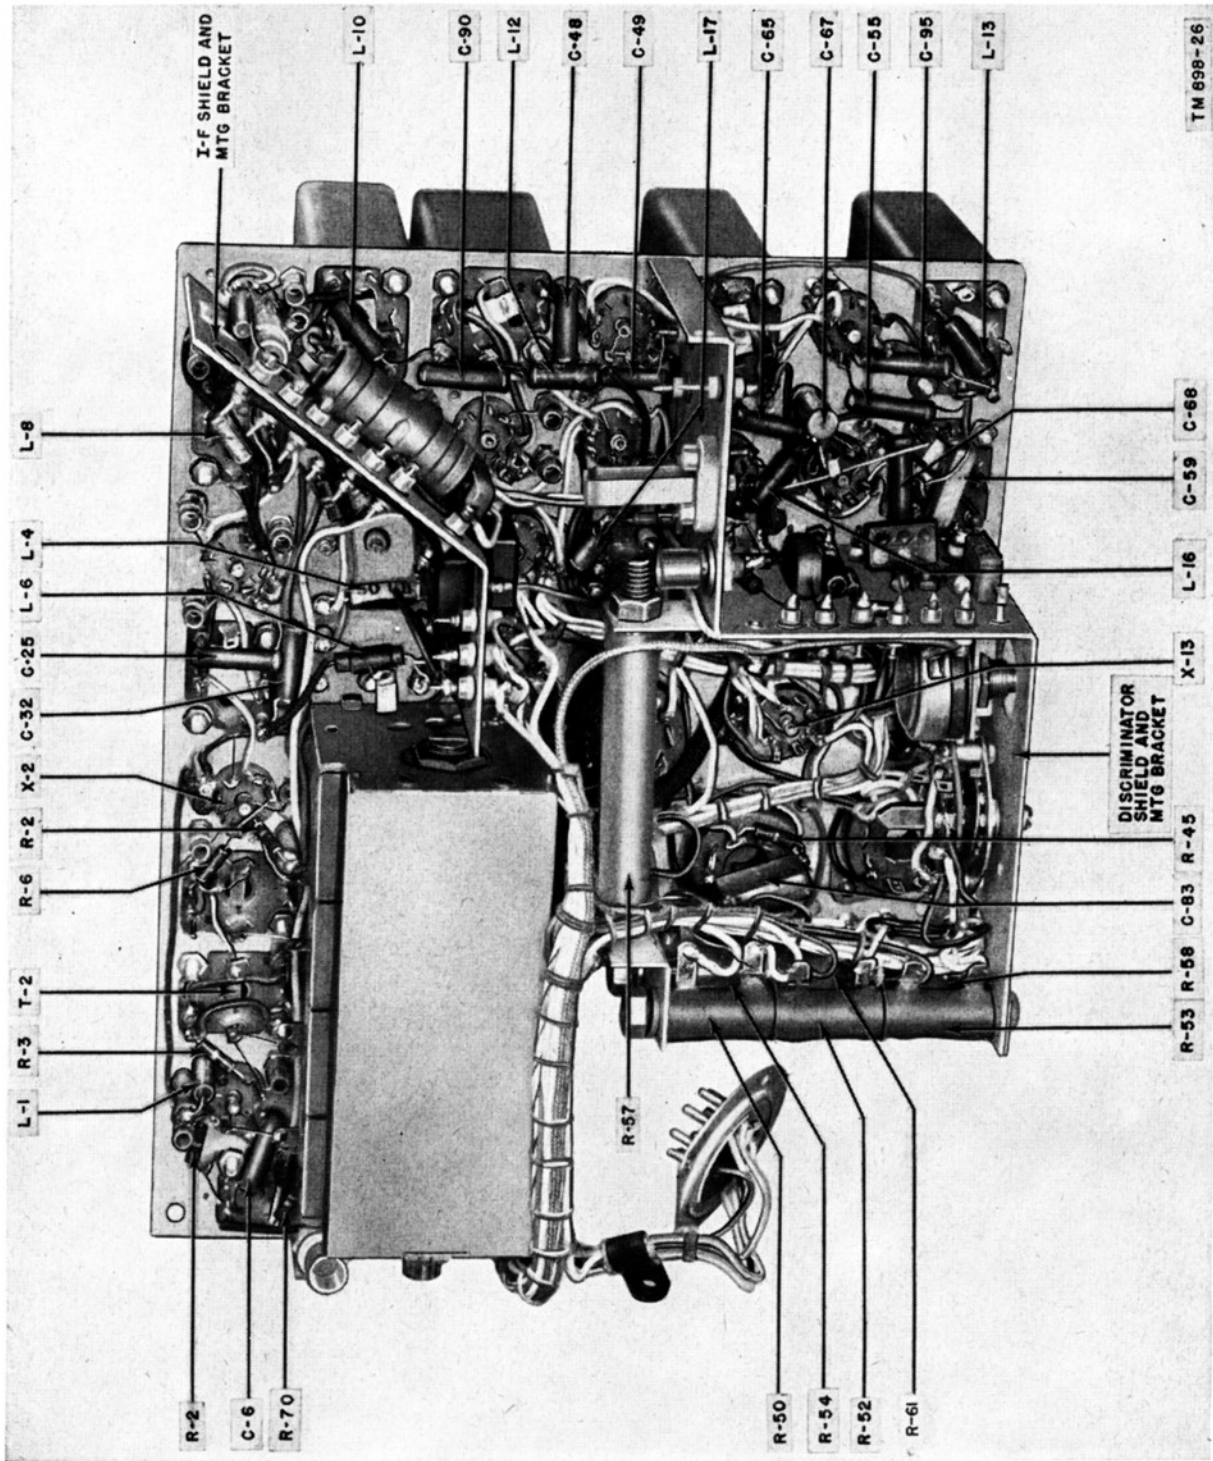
Typical receiver, bottom of chassis (oblique view of top and rear edges).
